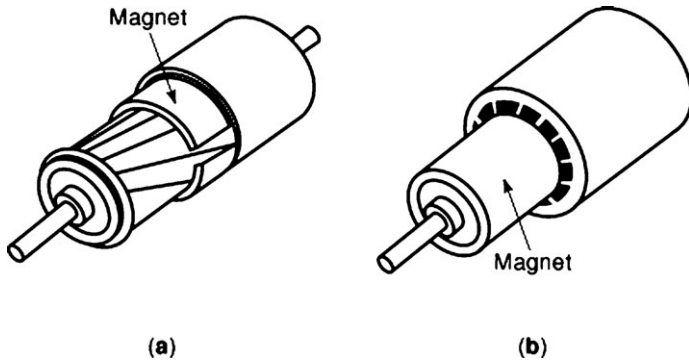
Dc motor designs; (a) brush motor with magnets on the stator; (b) brushless motor with magnets on the rotor.
